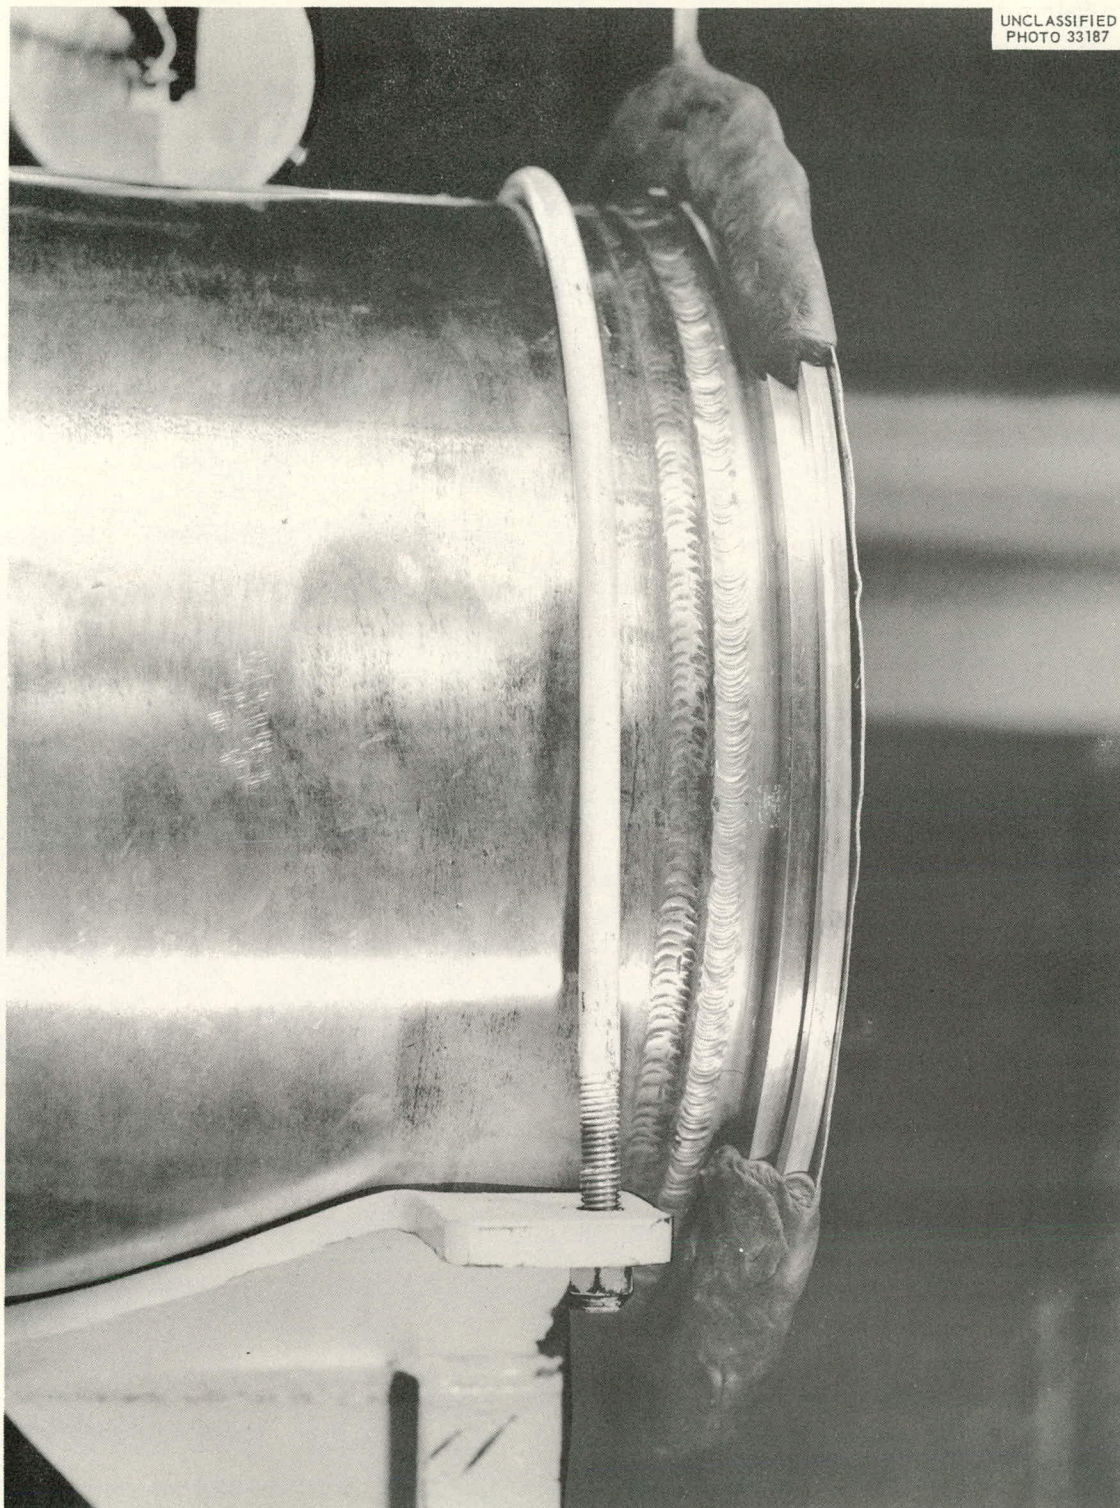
Outside Base Weld Leak Checking on PIG Facility.
